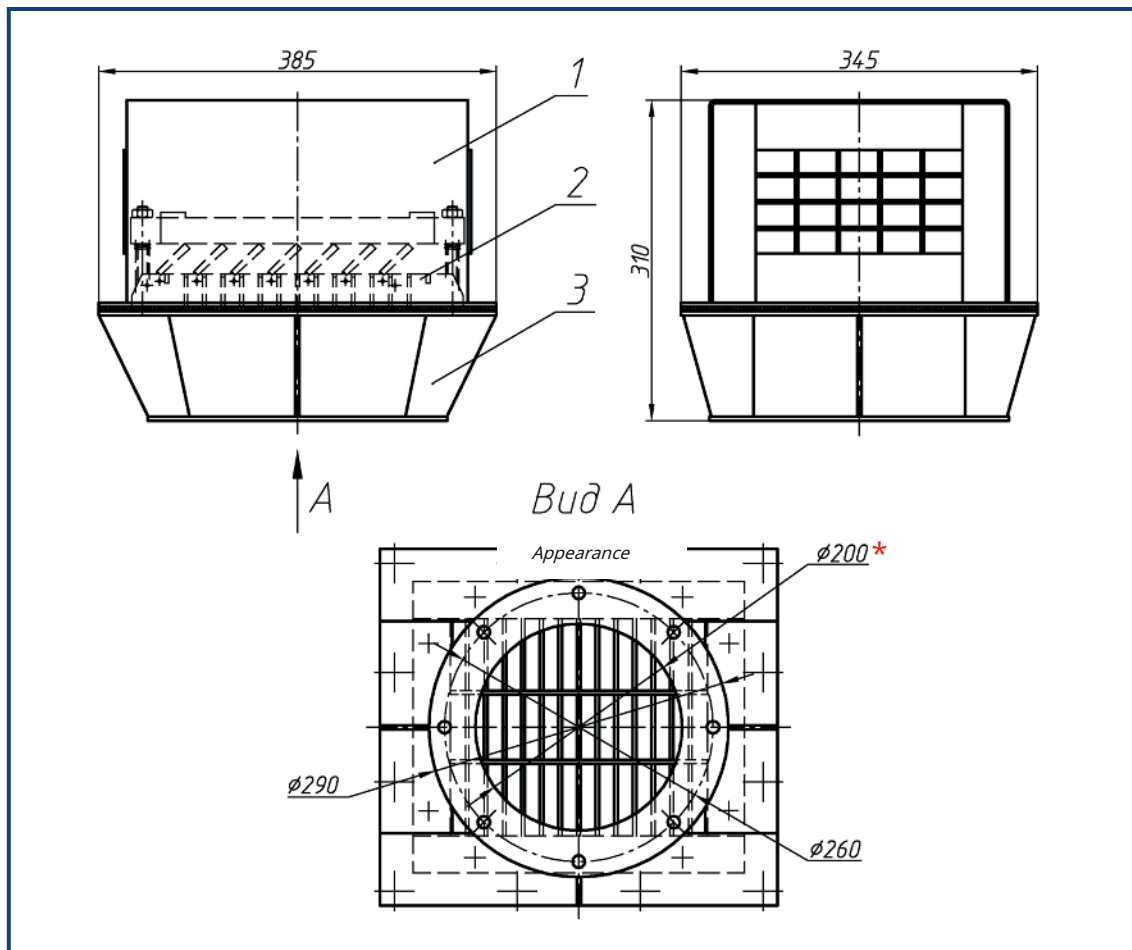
Steel casing with special adapter 1 - Steel casing; 2 – MFA section 282x321; 3 - Special adapter.
